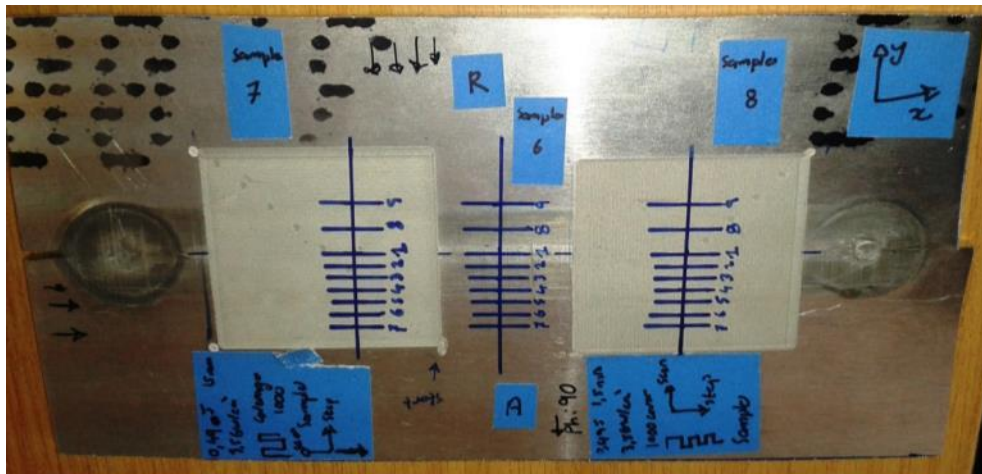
Residual Stress Samples and Measurement Positions across the Friction Stir Welded Joint
